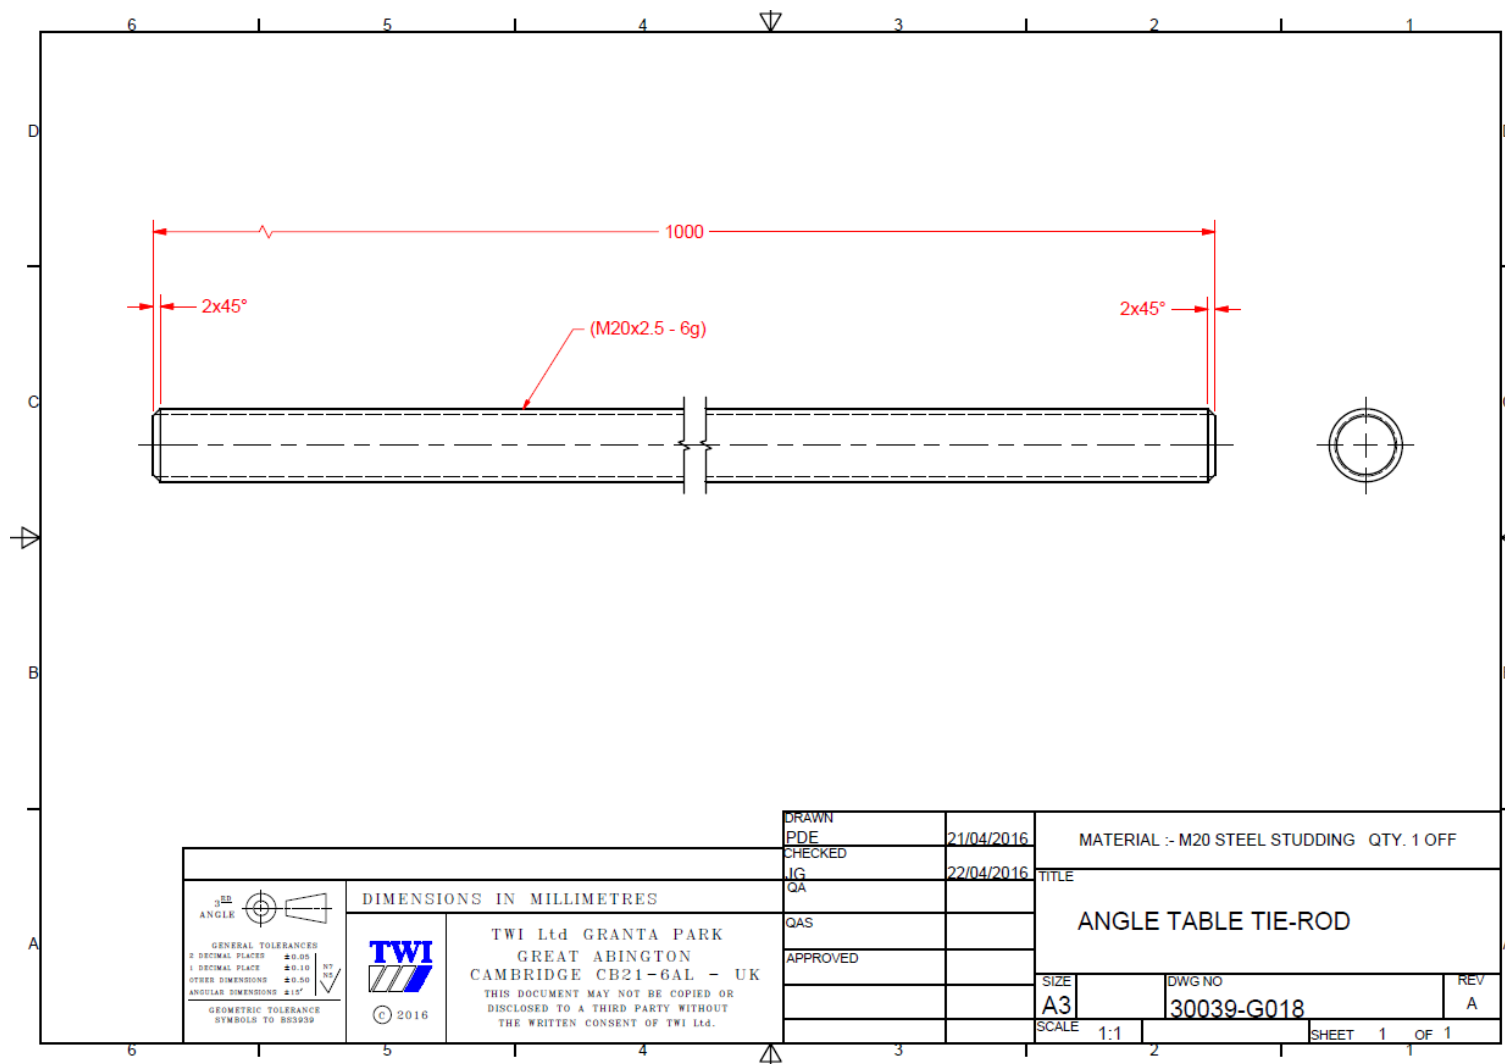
Technical drawing of the tie-rod of the tilting table
